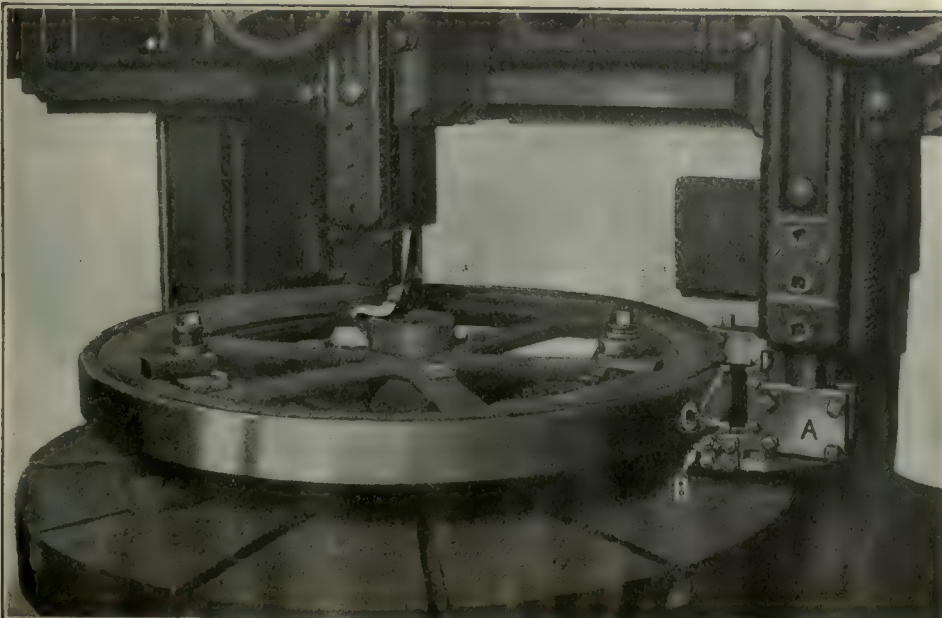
SPECIAL BORING MILL TOOLS FOR TURNING FLYWHEELS
